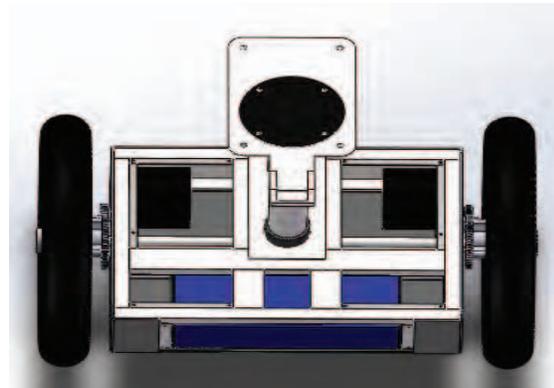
Assembling sketch. Assembly these larger components together ensuring simple and beautiful premise.
